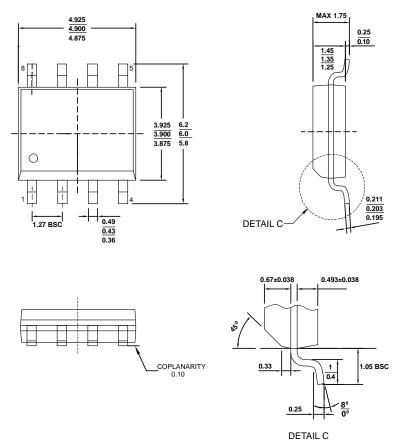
8-Lead SOIC Package Dimensions shown in millimeters
